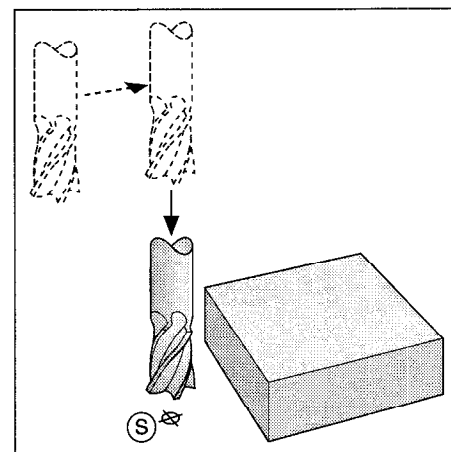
Separate movement of the spindle when there is danger of collision
